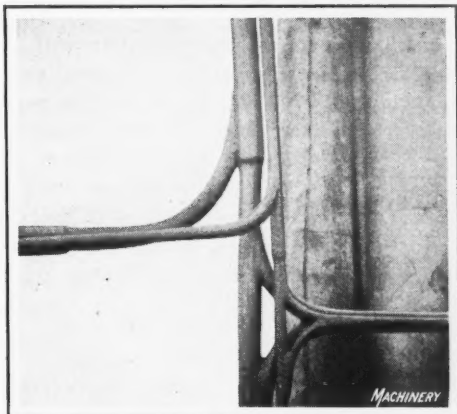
Oxygen and Acetylene Pipe Lines having Welded Joints
